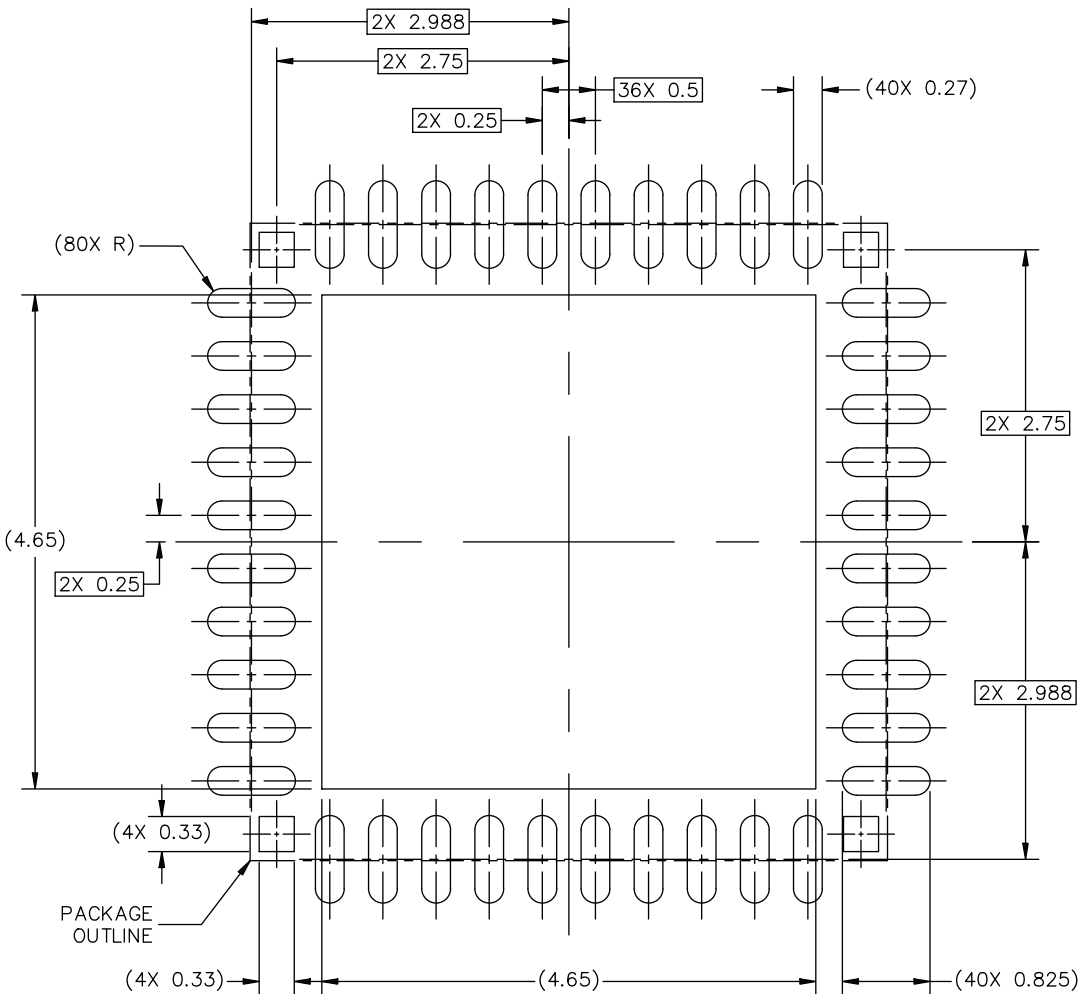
Reflow soldering footprint part1 for HVQFN40 (SOT618-20(D))
